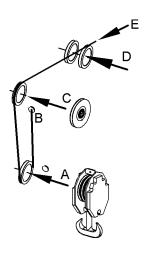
Auxiliary jib rope reeving system on 2316 jib head section (load position 2)
